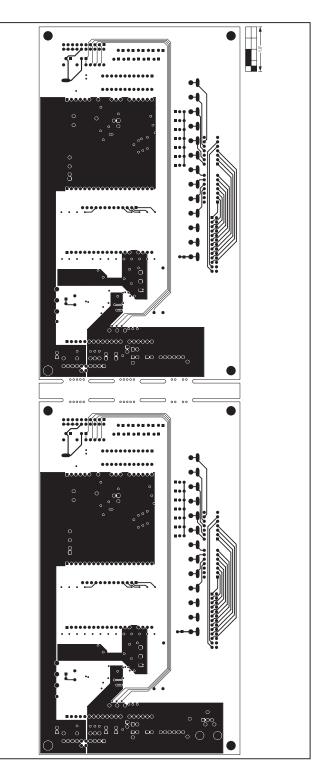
MAX11068 EV Kit PCB Layout—Solder Side
